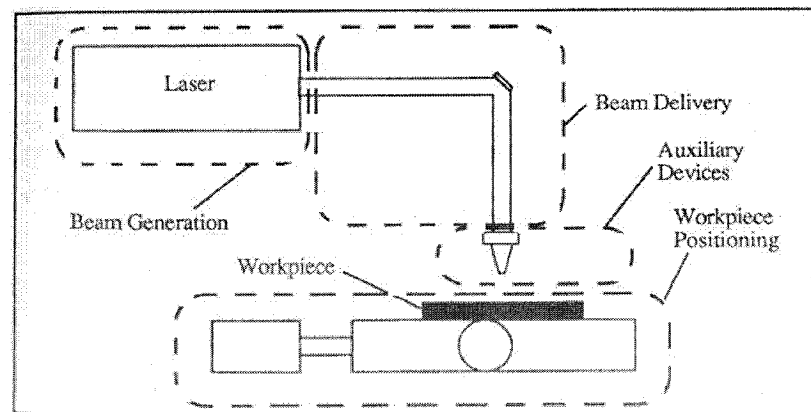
Schematic of components of a laser machining system (George Chryssolouris, 1991)
